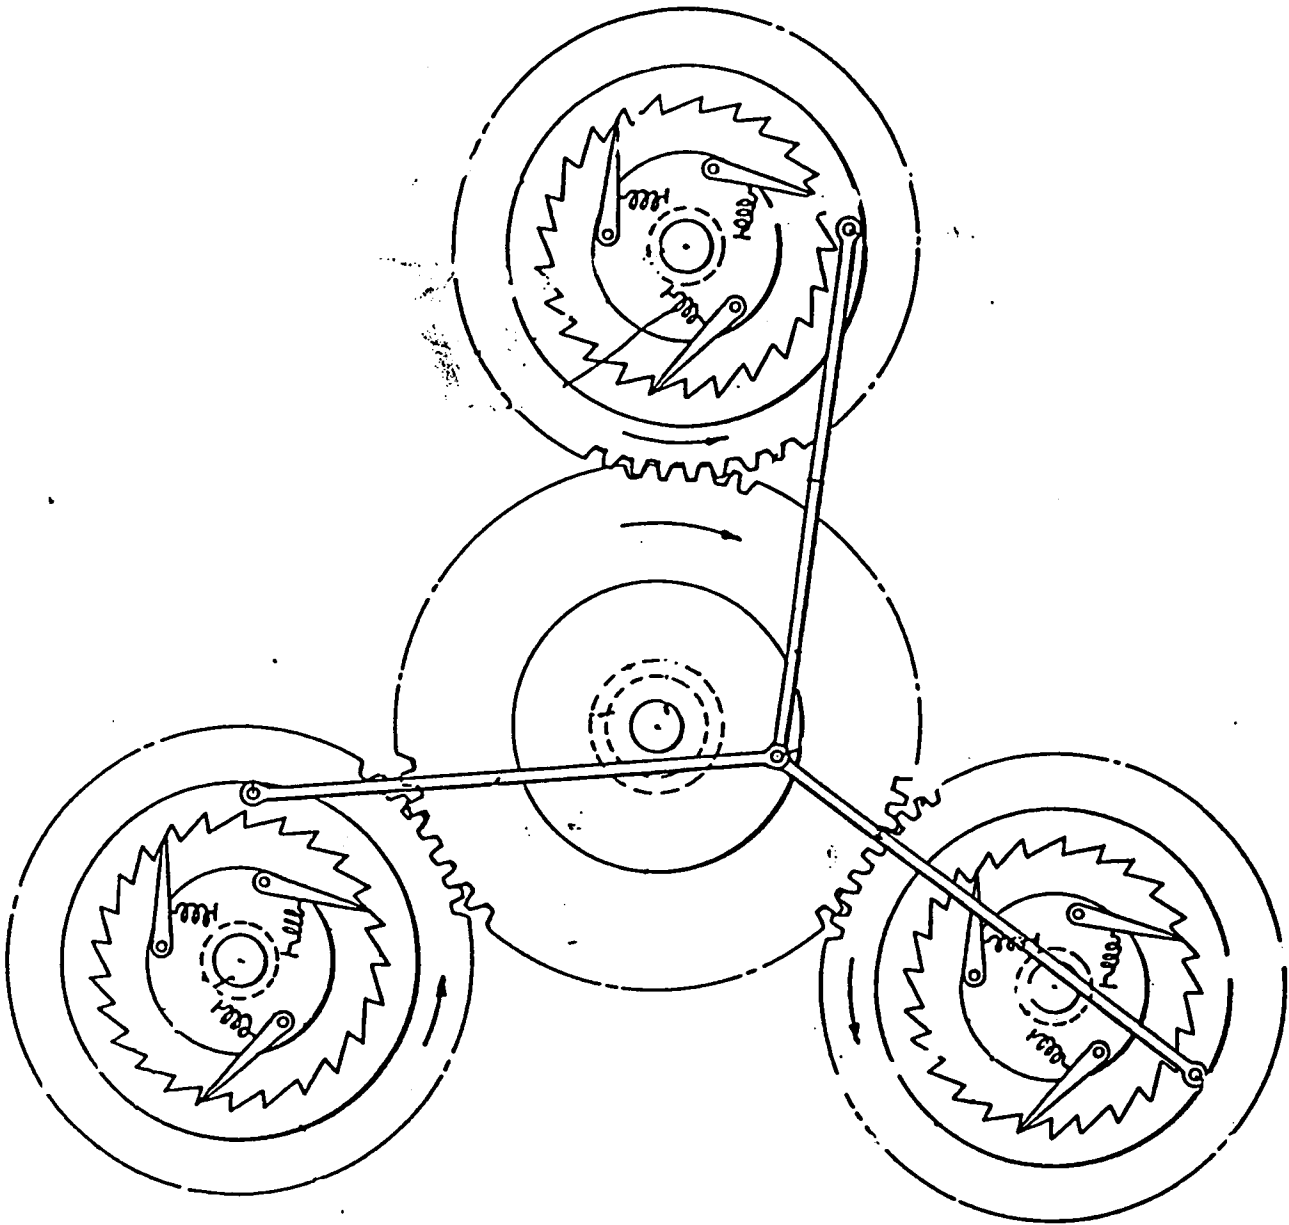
Schematic diagram of the 3-phase on-axis torque converter. The mechanism for changing the radius of the pivot point on the central drive disk is not detailed here. The load drive is via the larger gear which is coaxial with the motor driven shaft.
